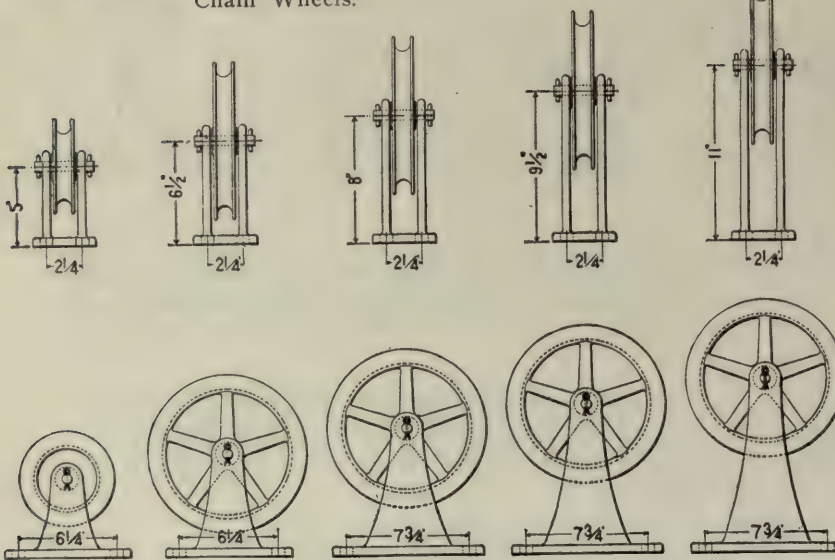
Roller Bearing Horizontal Chain Wheels.
